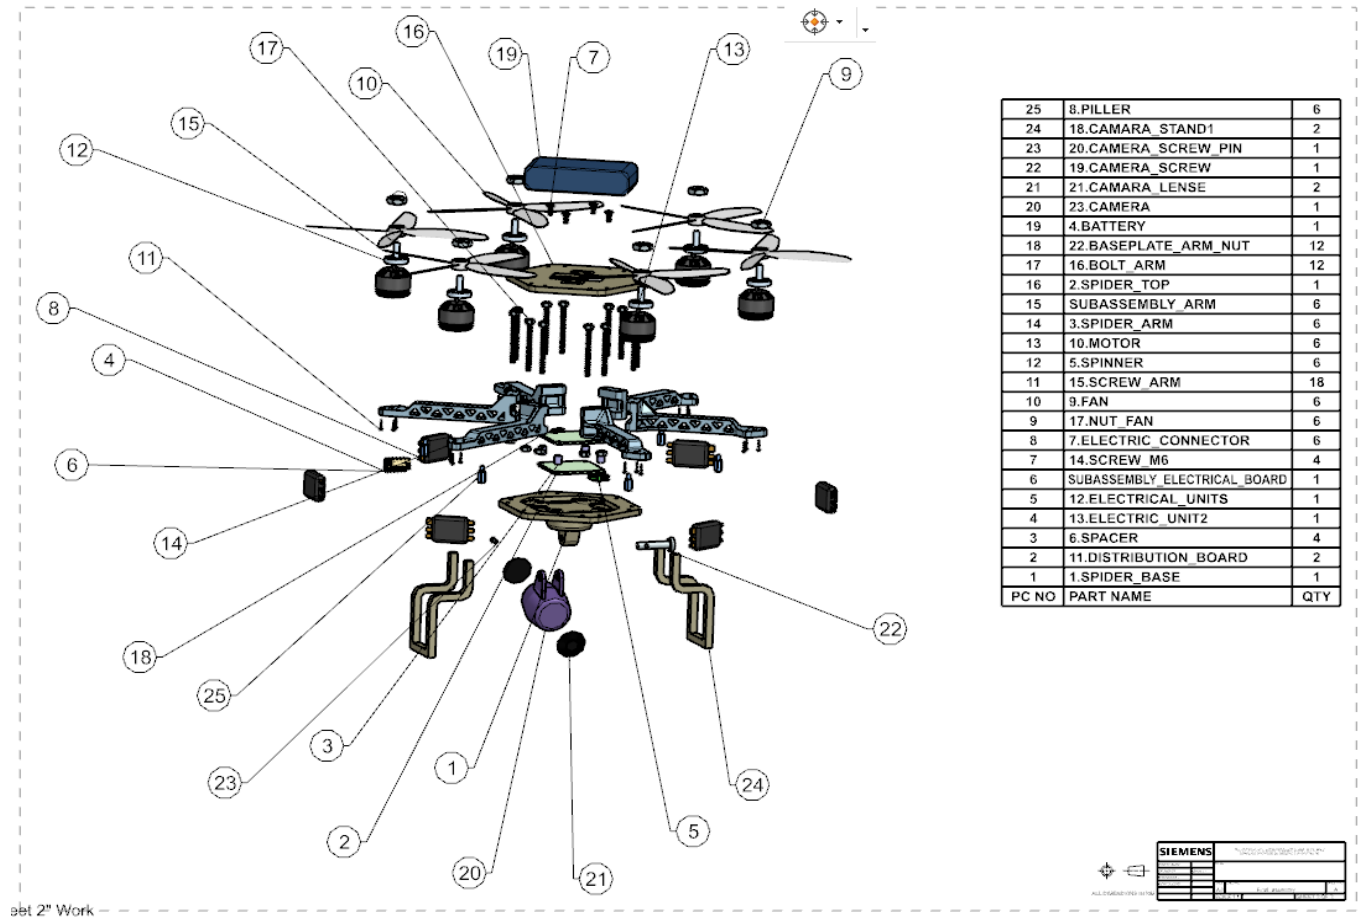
Exploded view of final assembly of Hexacopter with B.O.M
